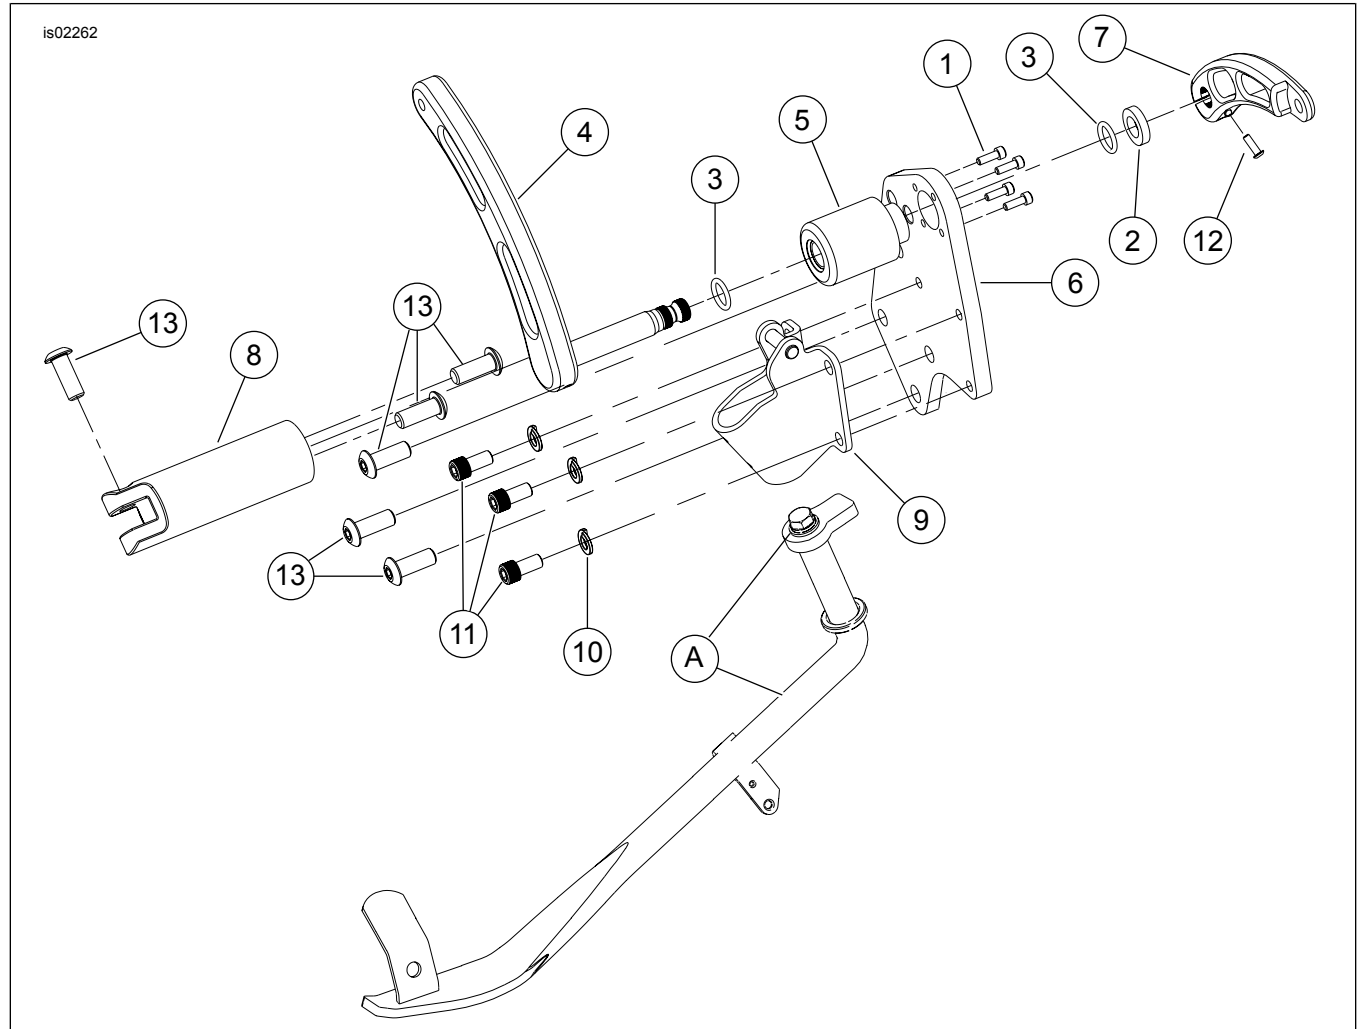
Service Parts: Billet Forward Foot Control Kit - Shifter Side Components
